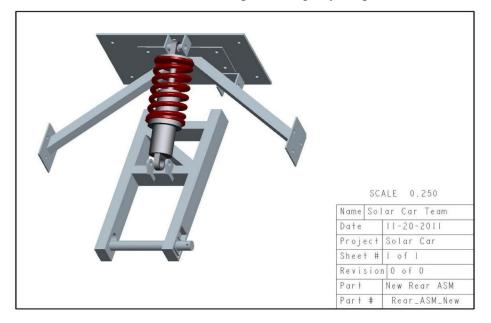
Pro-Engineer assembly of the first suspension design concept.
